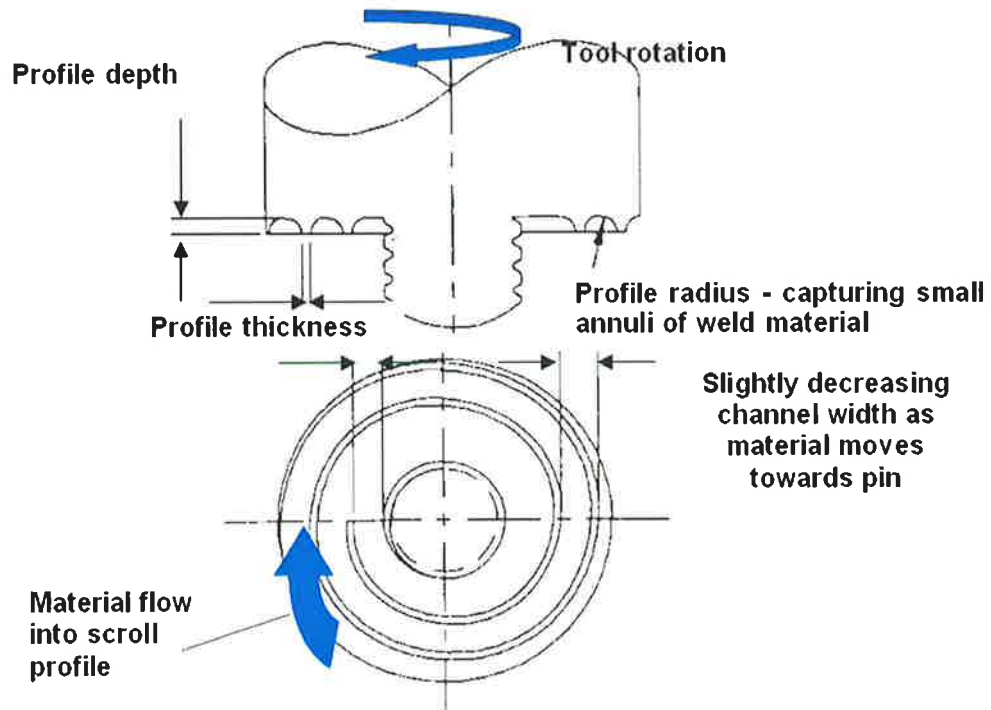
FSW tool with scroll shoulder and cylindrical threaded pin [111].
